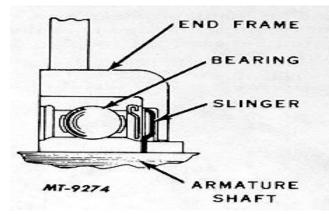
Drive End Bearing (Flat Washer May Be Used Instead of Slinger)
